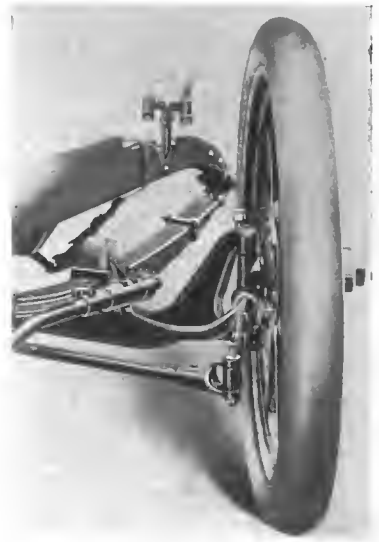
Suspension, Front Axle and Steering Knuckle Assembly.
